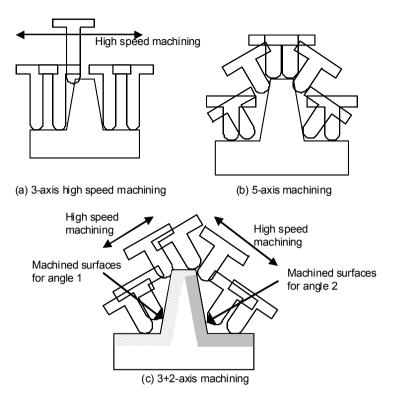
3-axis high speed machining, 5-axis machining, 3+2-axis machining
